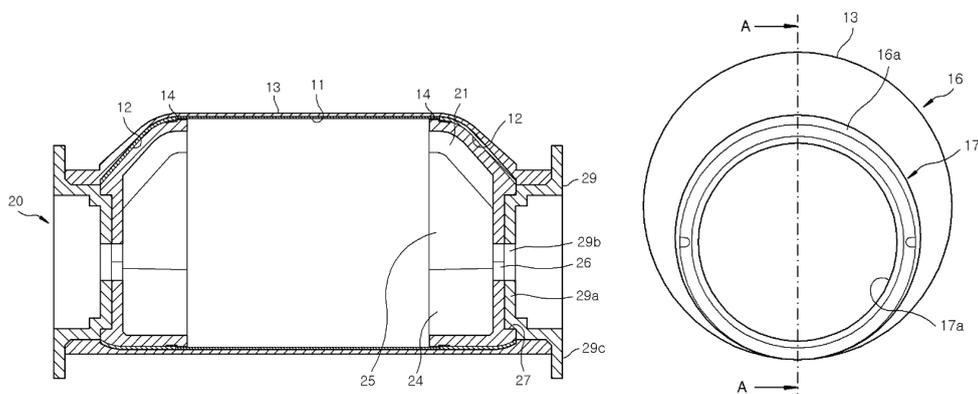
Exhaust smoker design drawing (left: cross section, right: longitudinal direction)
